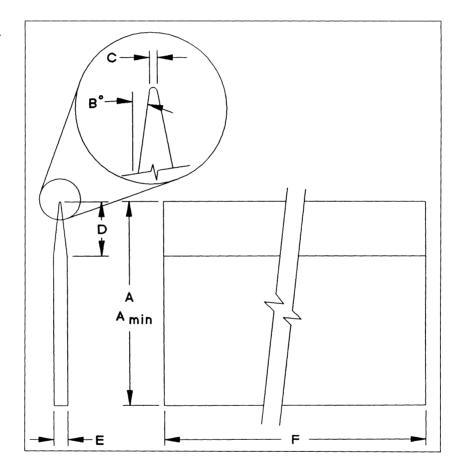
View of a rotary knife of a roller gin stand (see table 10–1 for dimensions). *Dia.*, diameter.
